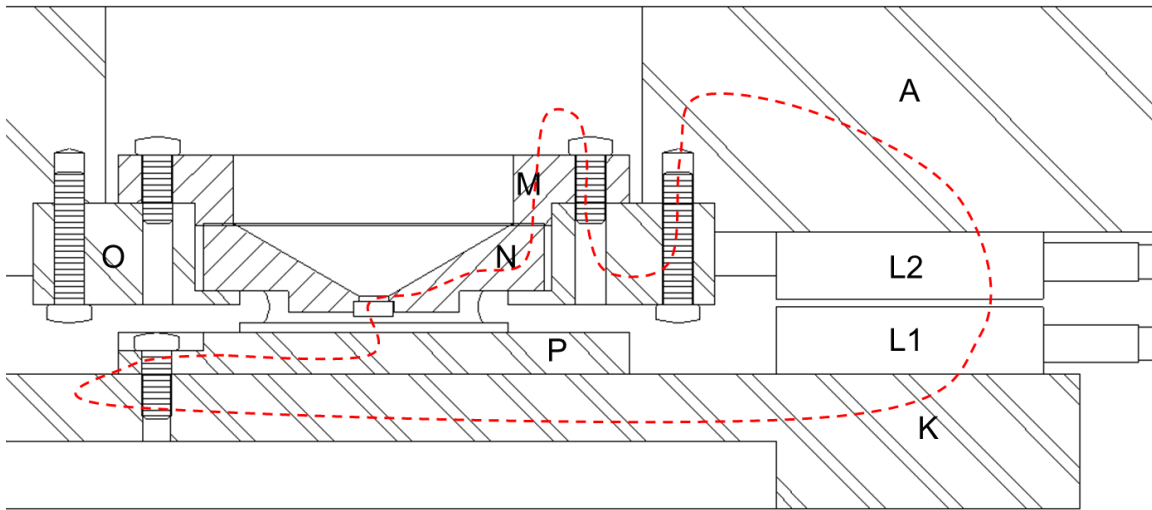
Expanded cross sectional view of the assembled stage. The metrology loop is shown as the dotted red line.
